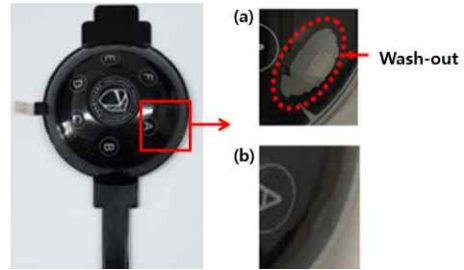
Film insert molded sample using (a) PC (b) PMMA
